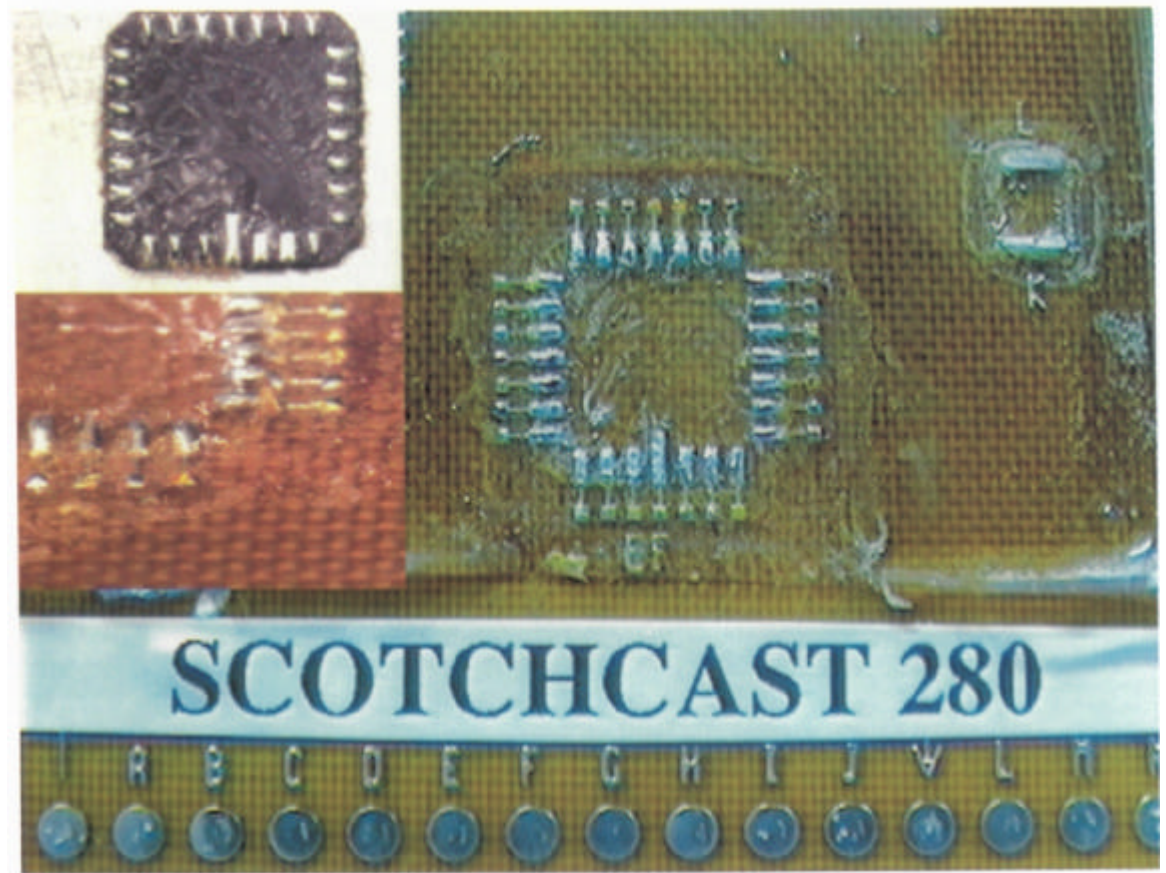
Scotchcast 280 - Only with a soldering iron at 300°C was it possible to remove this coating. Complete removal of material from the pcb was very difficult. Removal of a chip carrier required nine seconds
